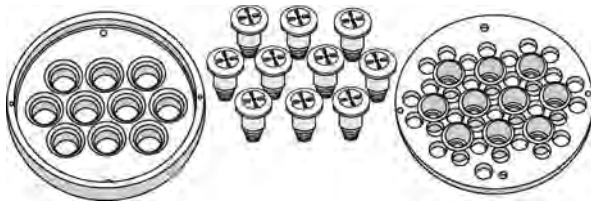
Poppet valve, illustrating seat, sealing elements and springs, and guard. (Hoerbiger Corporation.)
